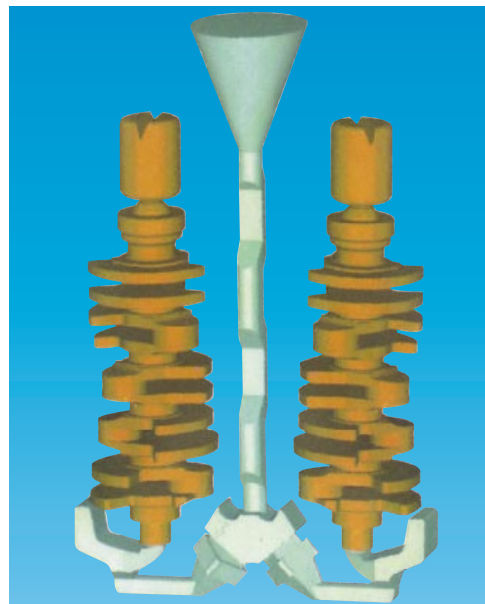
Crankshaft casting in vertically parted shell mould. Runner system with integrated filters
